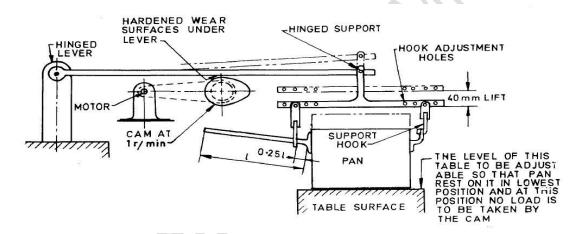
C Arrangement for Fatigue Tests - For One Straight Handle and One Loop, Flange or Similar Handle
